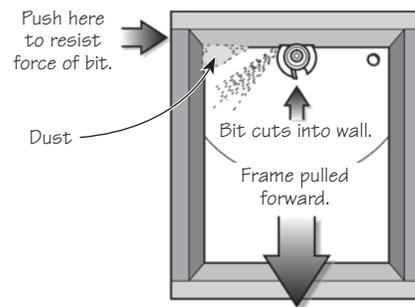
Bringing the workpiece to the bit. (Clamps removed for clarity.)
